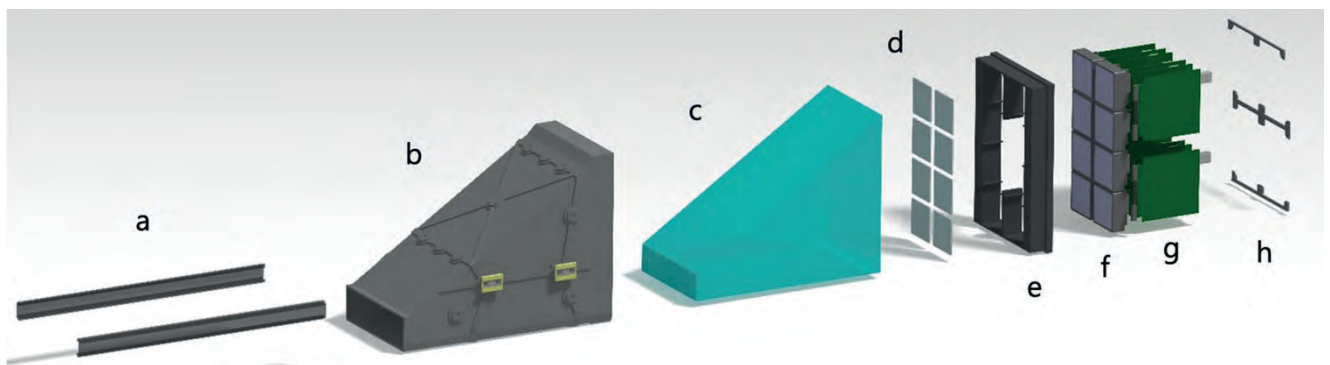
Exploded CAD view of the main components of the readout module for the PANDA Barrel DIRC (see text).
